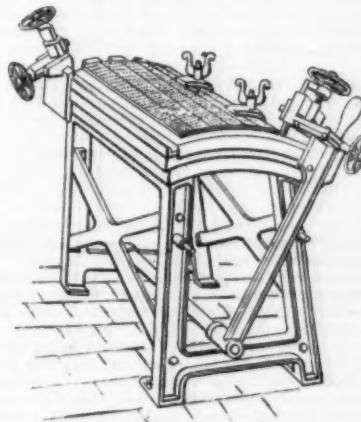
TRIMMING MACHINE FOR CURVED PLATES.
